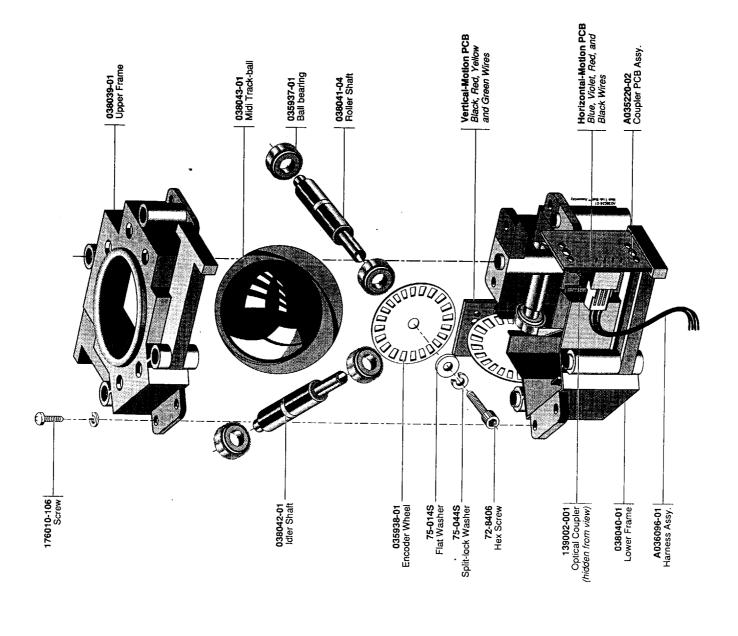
Midi Trak-Ball Assembly A038038-01 F
